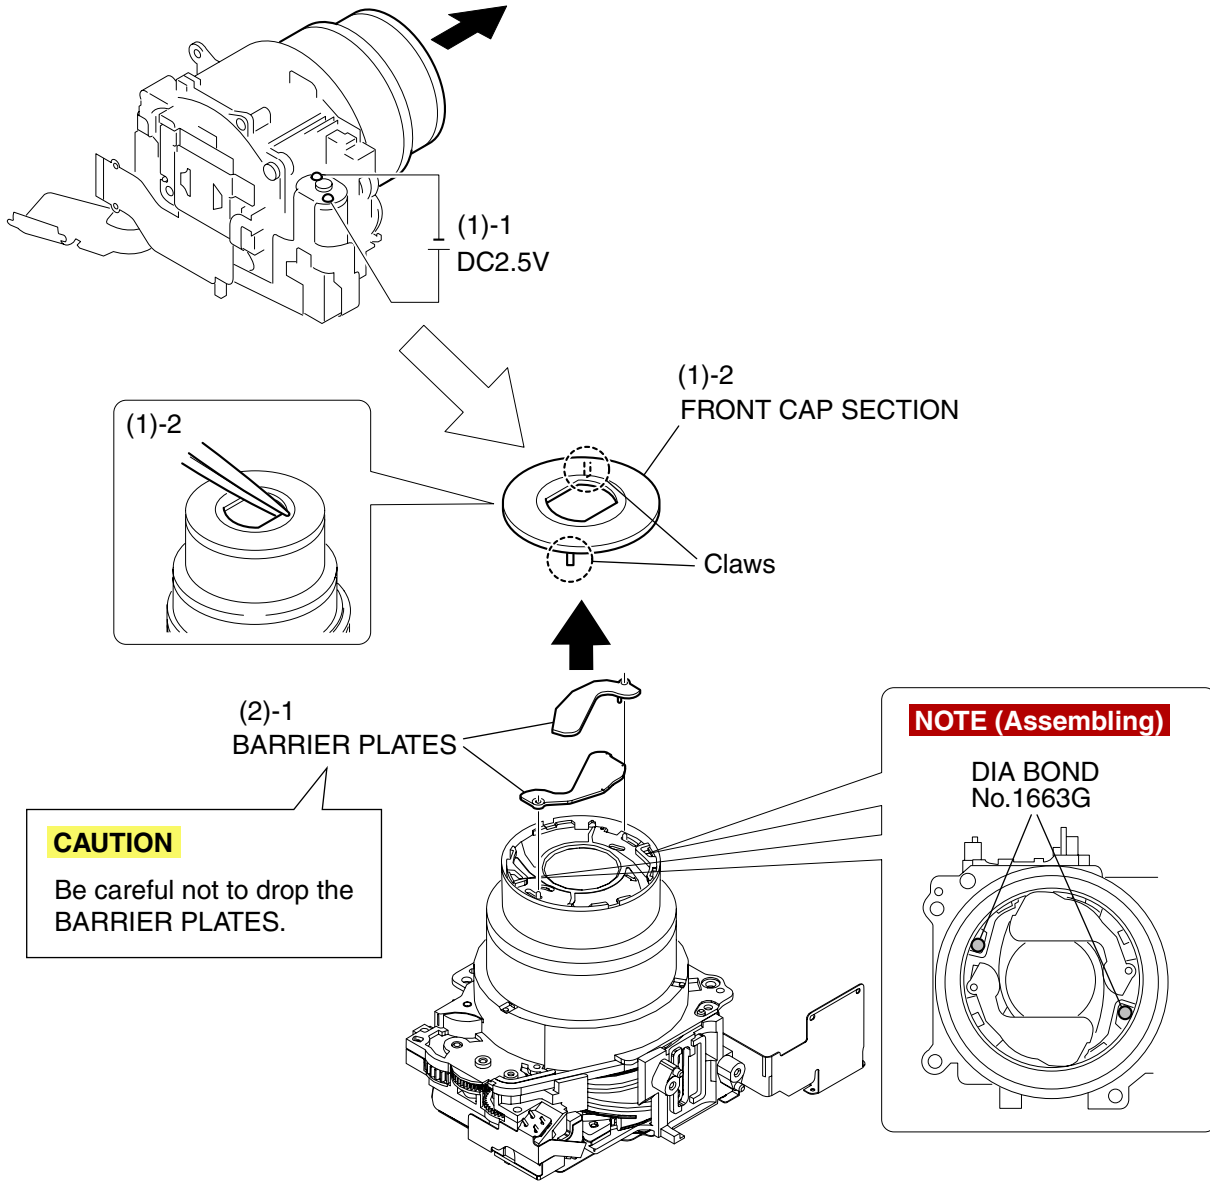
FRONT CAP SECTION, BARRIER PLATE
